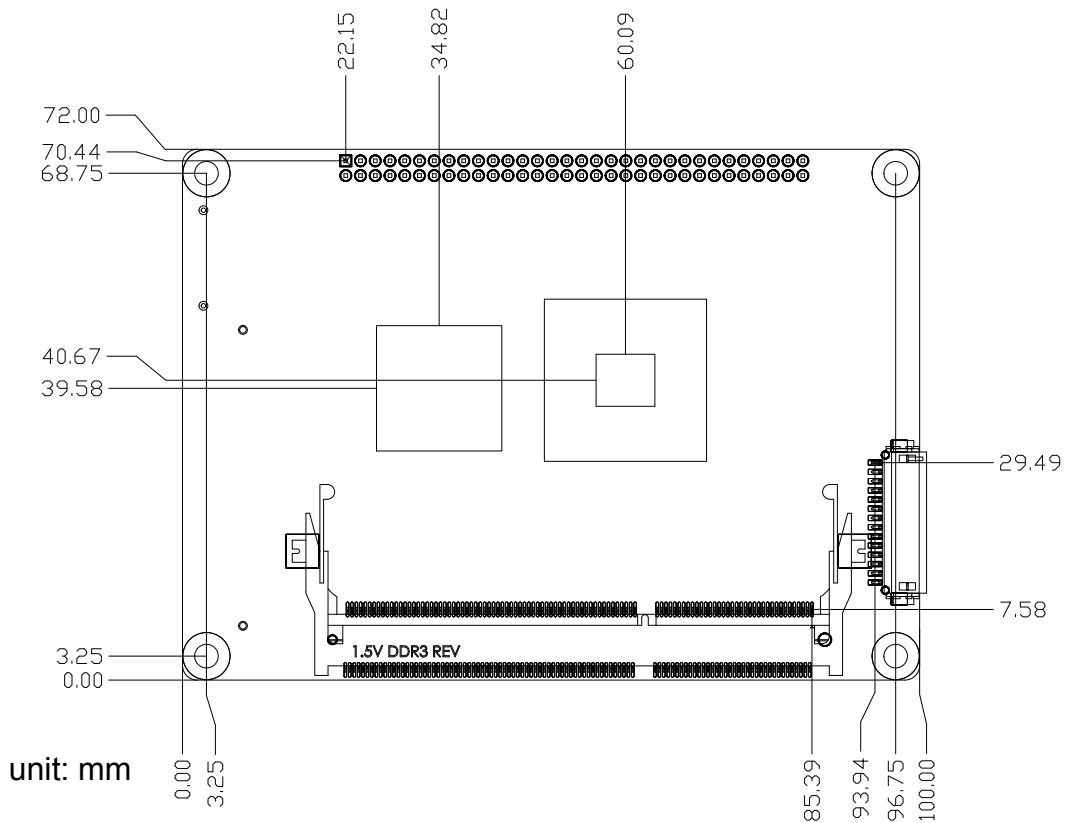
MIO-2262 Mechanical Drawing (Top Side)
